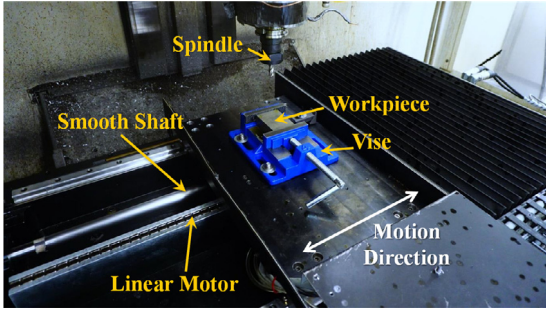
Experiment setup: HFD mounted on a milling machine.
